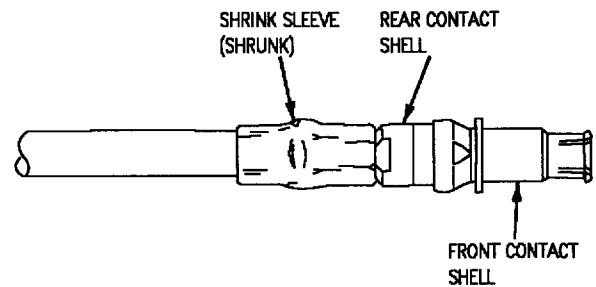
885-270-001 Coaxial Assembly Procedure (Sheet 3)
